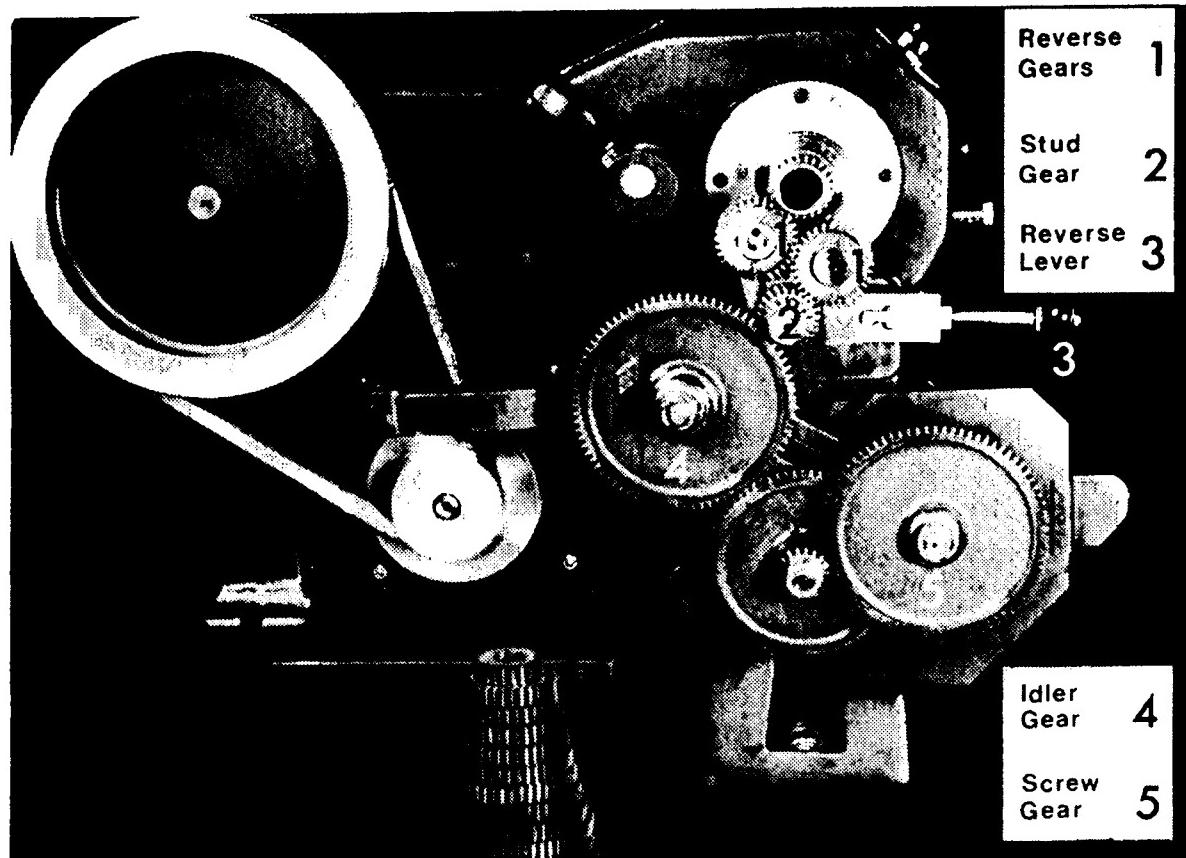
Set up of Standard Change Gear Lathe for Cutting Screw Threads (Fig. 4 on gear chart)
